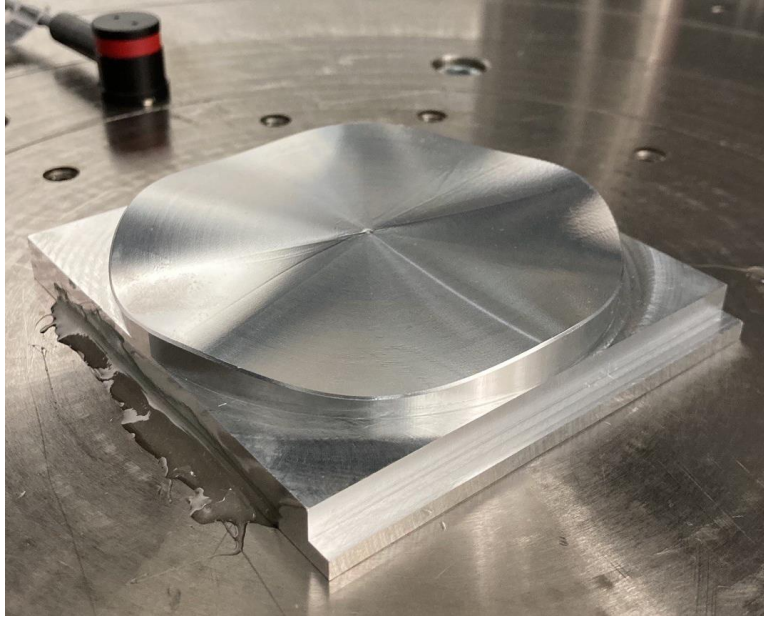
Aluminum workpiece used for the 2D experiment with a local thermometer on the rotary table
